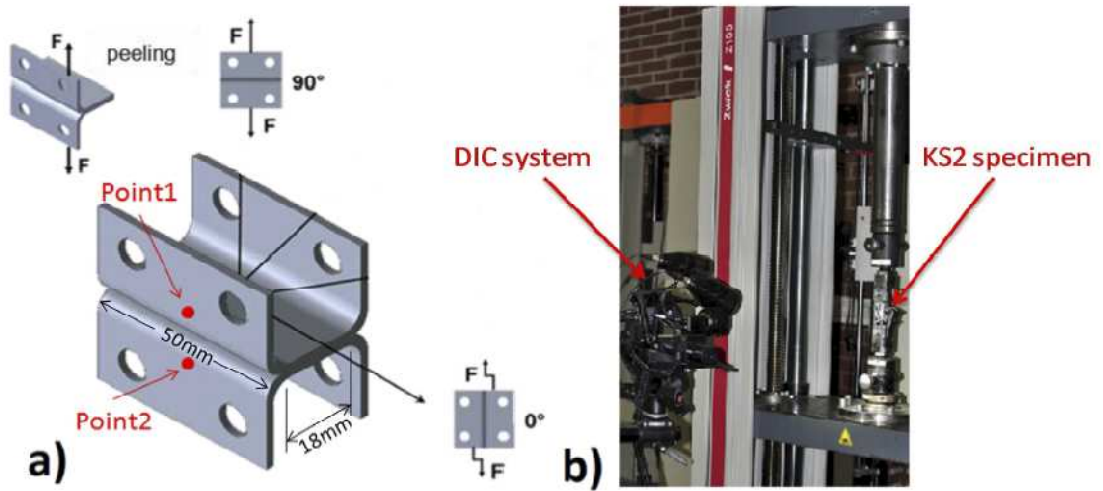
KS2 specimens, a) schematic of KS2, b) universal tension machine
